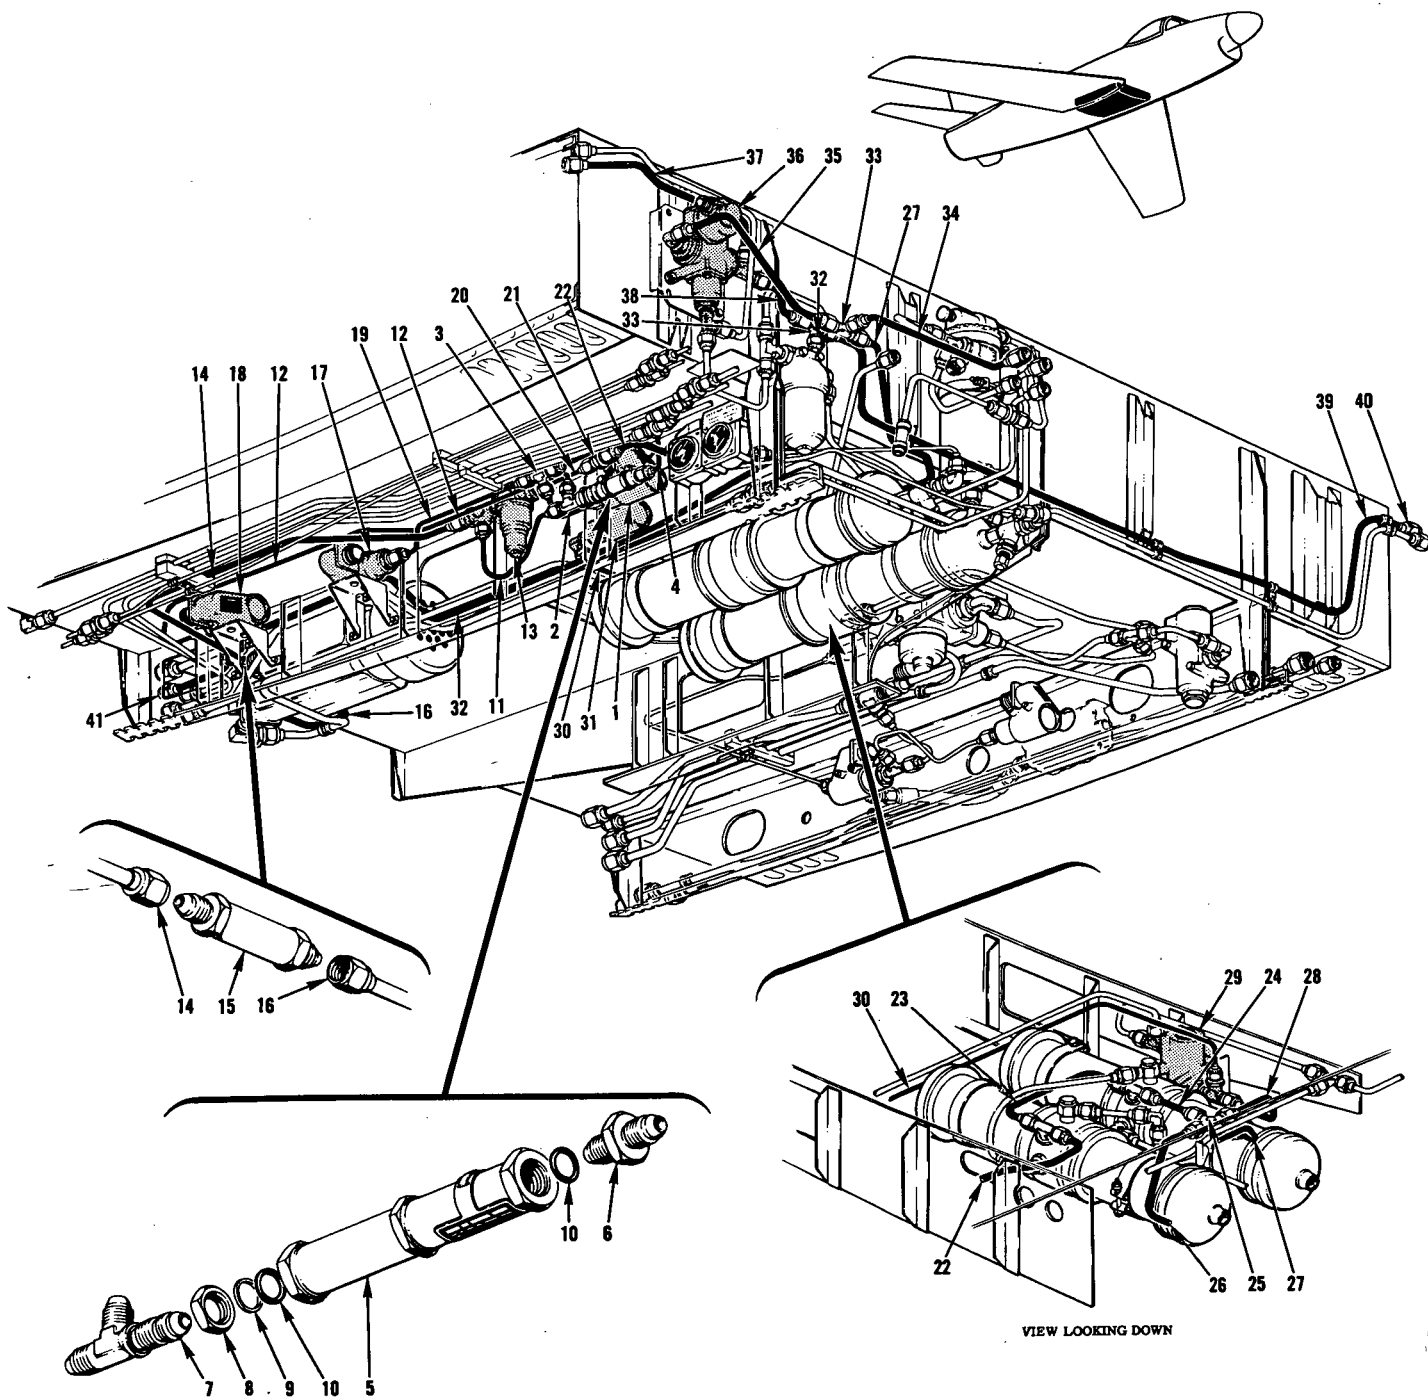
WING CENTER SECTION HYDRAULIC FLIGHT CONTROL PRESSURE EQUIPMENT
